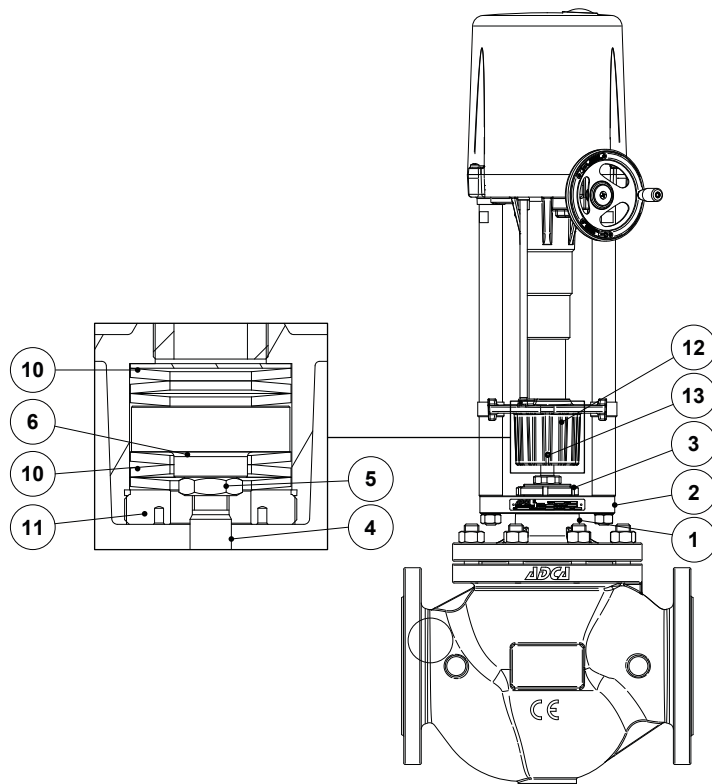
Mounting the actuator onto the valve (ELS200 and ELS250)
